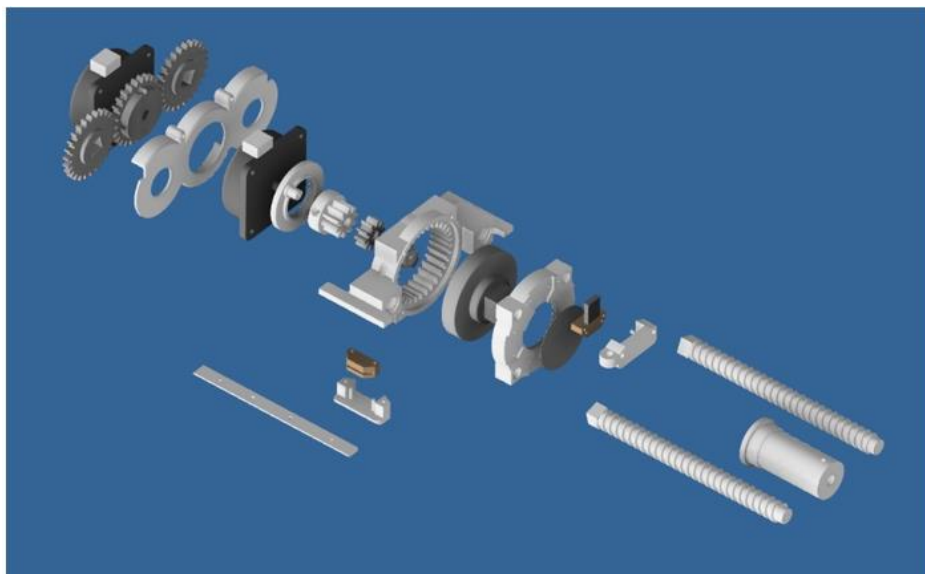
The exploded diagram of the X and Θ -axis components.
